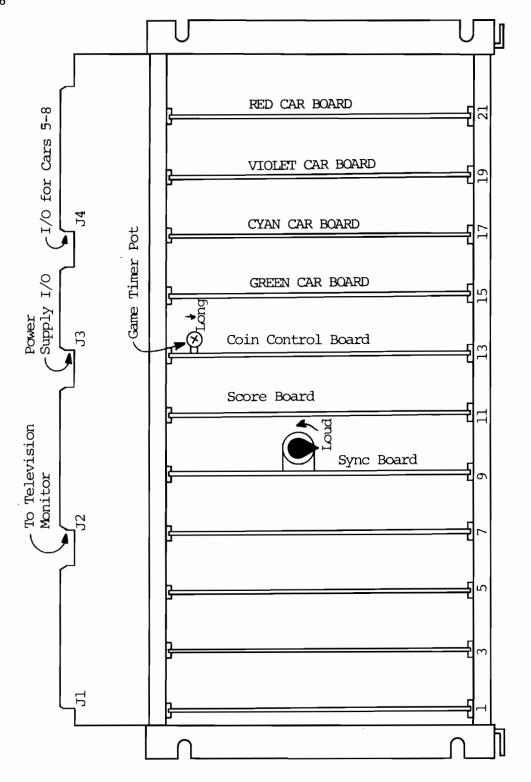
Indy 400 Card Rack Layout (Front View)
